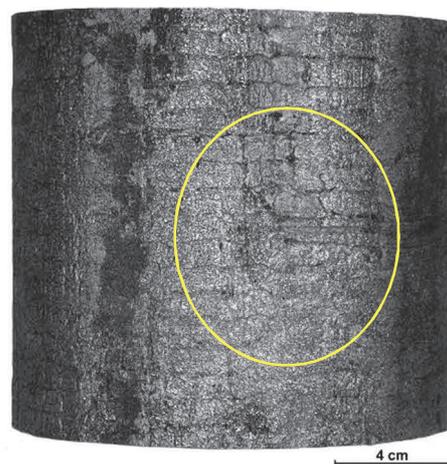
Surface defects of \varnothing 170 mm billet cast from C45 steel
